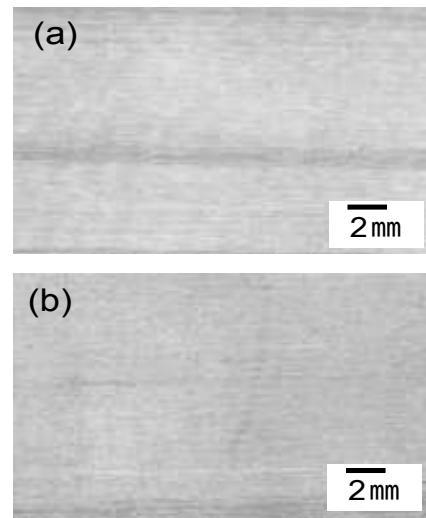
Strip surface of the cold-rolled strip. The as-cast strip was cold-rolled down to 1mm. (a) cross grooved roll, (b) parallel grooved roll
